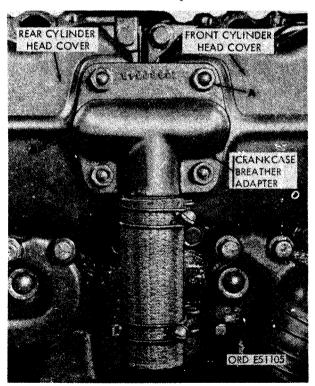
REMOVING CRANKCASE BREATHER ADAPTER.
